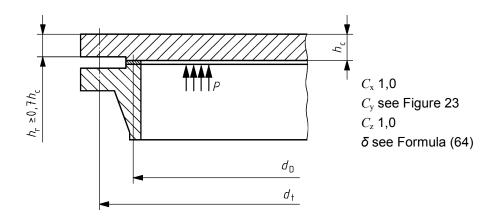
Cover with gasket (direct loading) entirely within the bolt circle
